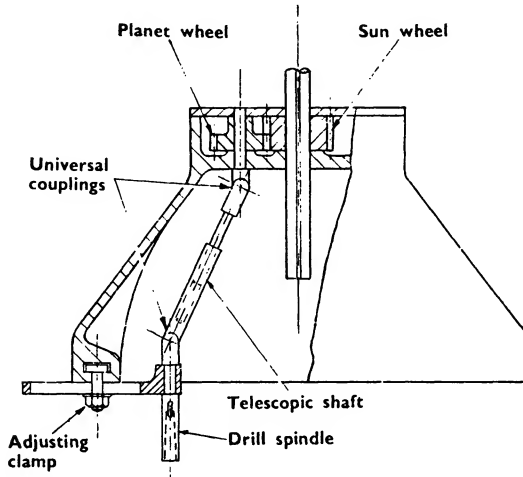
DIAGRAM OF THE SPINDLE DRIVE AND MOUNTING ON A MULTI-SPINDLE DRILL
